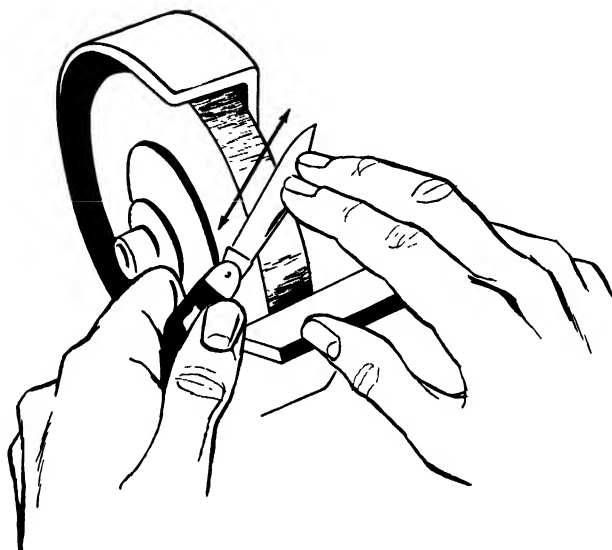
Grinding a knife. Hold the blade at an angle to the wheel, use moderate pressure, and move the knife slowly from side to side.
